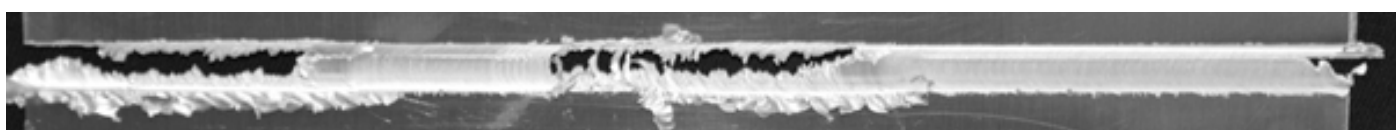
Joints made of 2.0 mm thick sheets in relation to selected welding parameters
